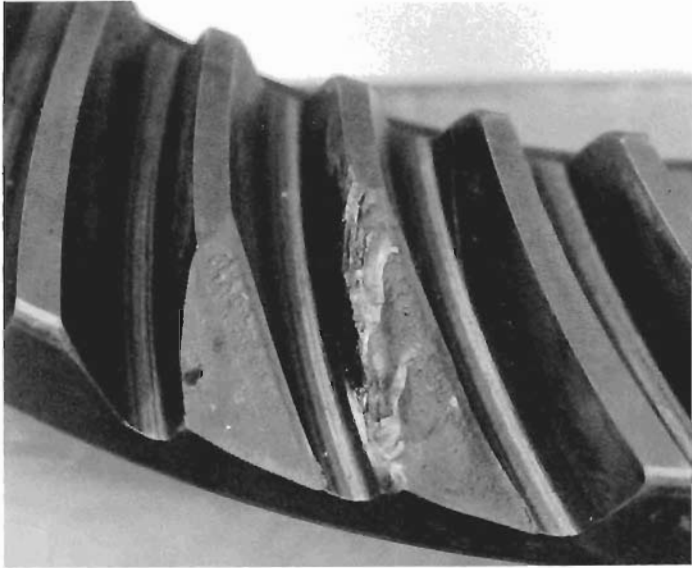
Spiral gear teeth, 1 \times . Tooth bending impact with peak loads being applied high on the profile over the top corner of the heel end of the convex (loaded) side.
